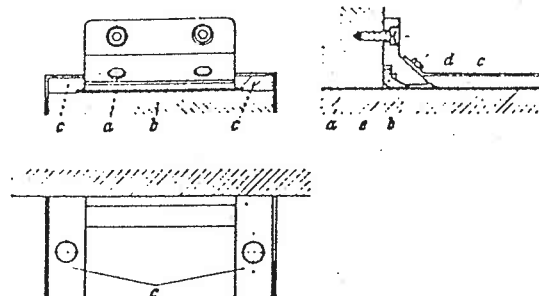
Arrangement of scrapers on flat slideways (Scharmann). a —hardened steel tape; b —slideway casting; c —lateral steel strips; d —scraper fitted without play between c ; e —“hydrofit” seal scraper.
